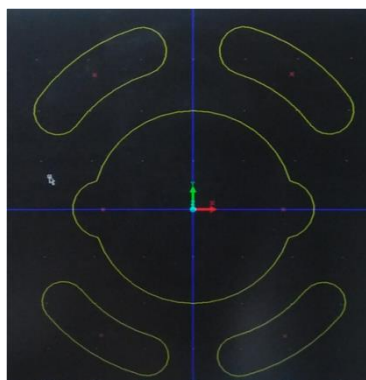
The machined contours on the workpiece, built in the PEPS software environment.
